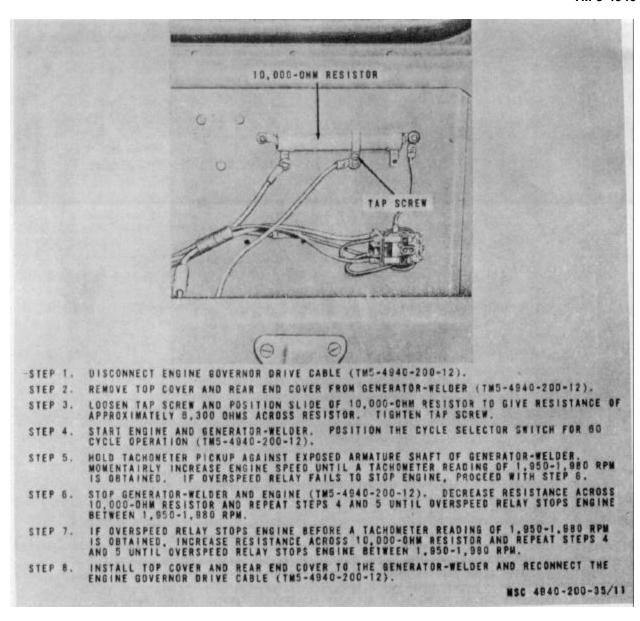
Engine overspeed relay, model CMU-5, adjustment.
